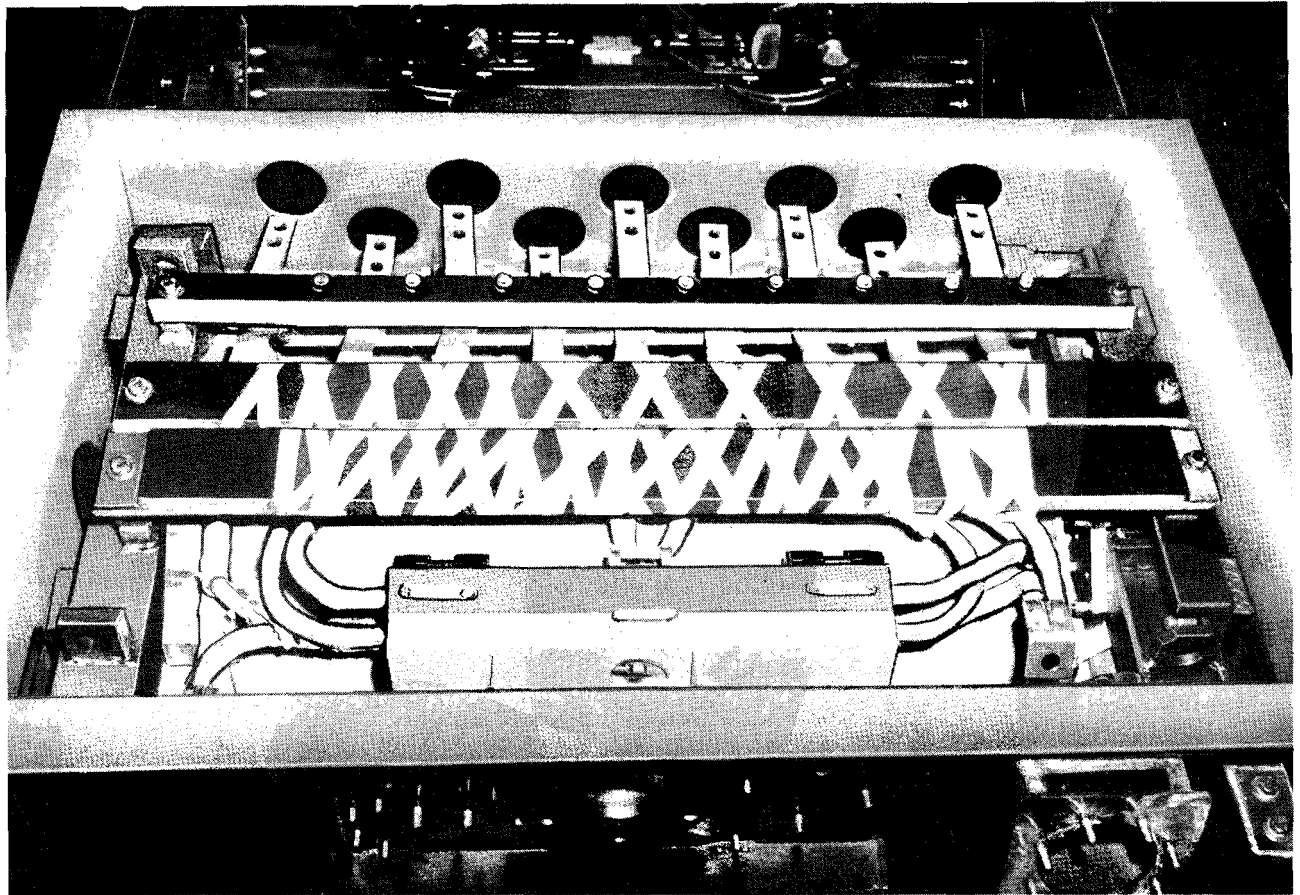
CORE READY FOR REMOVAL. E-18807
